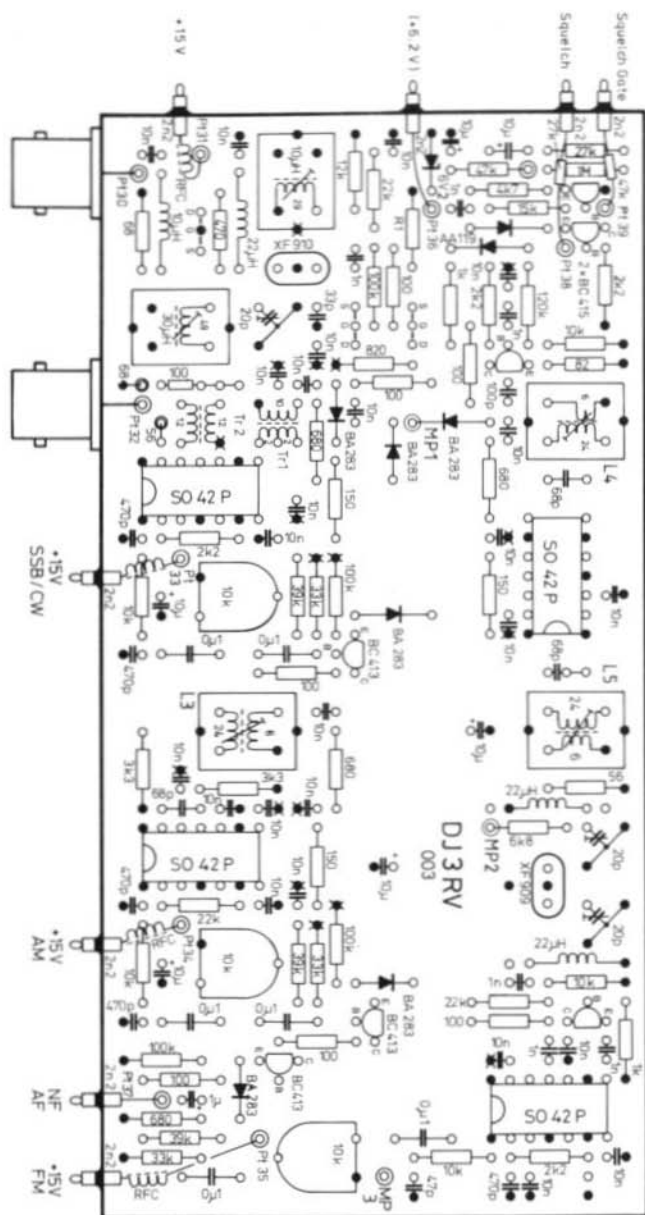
The connections marked with crosses should be soldered on both sides of the PC-board DJ3RV 003.
